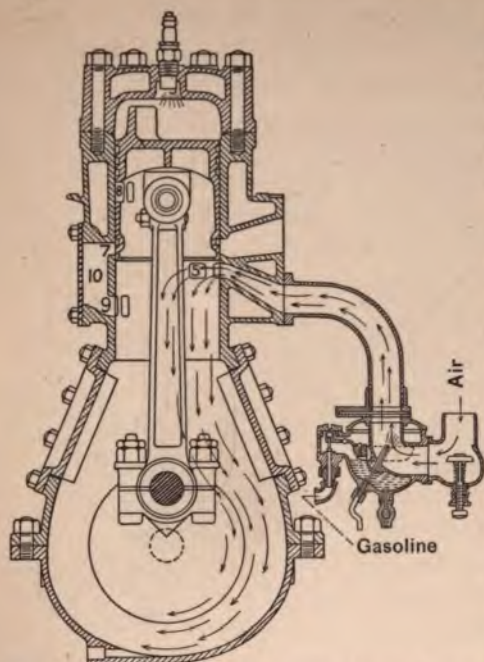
End of compression stroke on 2-cycle, 3-port engine. The third port (5), leading from carburetor to crankcase, is open
